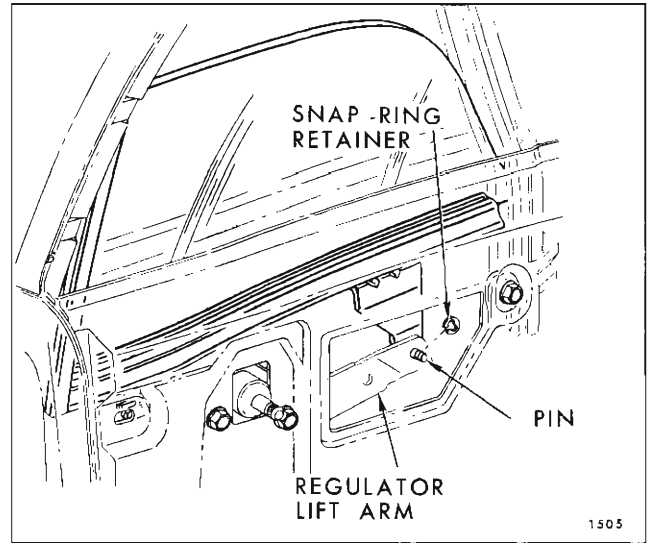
E18—Rear Quarter Window Attachment - "11" Styles
